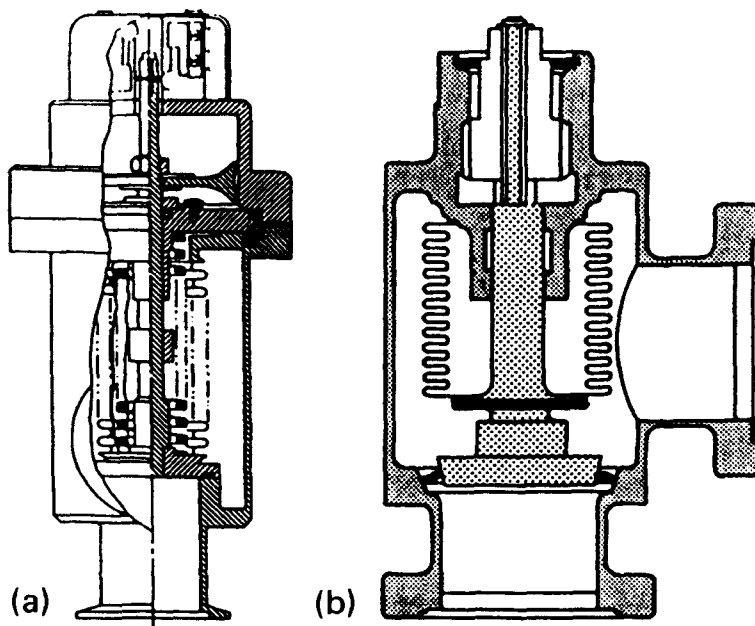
Small right-angle valves: (a) Elastomer-sealed, pneumatically driven valve with a bellows shaft seal. Reprinted with permission of HPS division of MKS Corp., 5330 Sterling Drive, Boulder, CO 80301. (b) All metal valve with metal sealed seat. Reprinted with permission of VAT Inc. 600 W. Cummings Park, Woburn, MA 01801.
